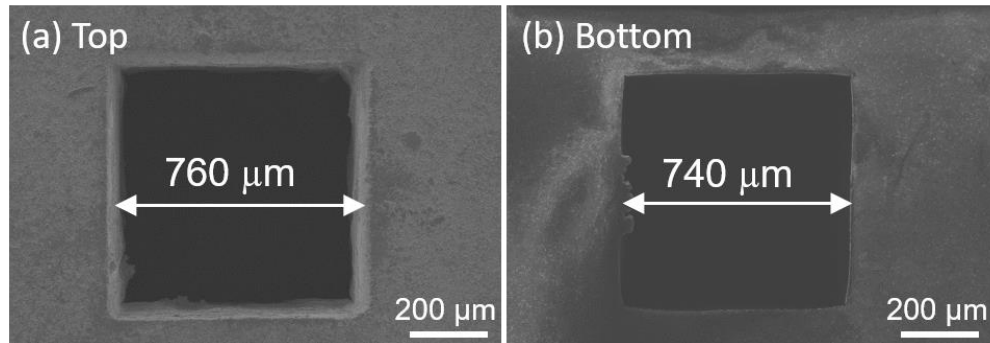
SEM images of a hole fabricated in a 1.6 mm-thick LTCC plate using optimized parameters: (a) top view, and (b) a bottom view.
